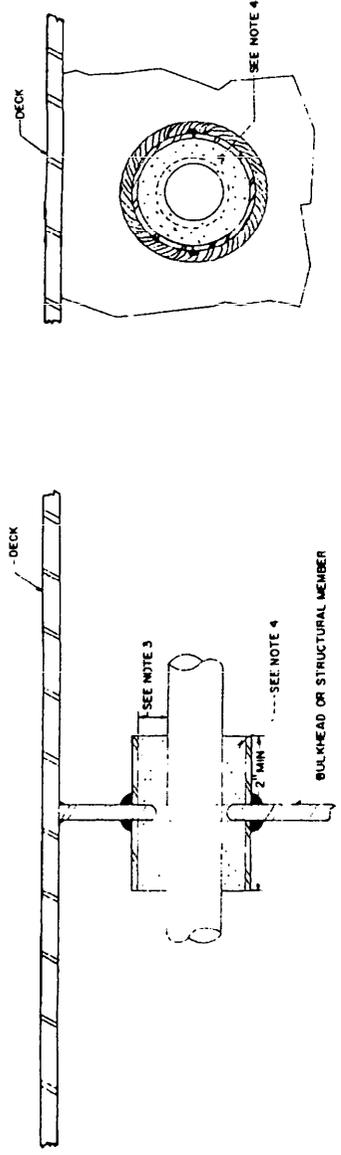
C17. Cableway through non-watertight bulkheads and beams with fire stops.
